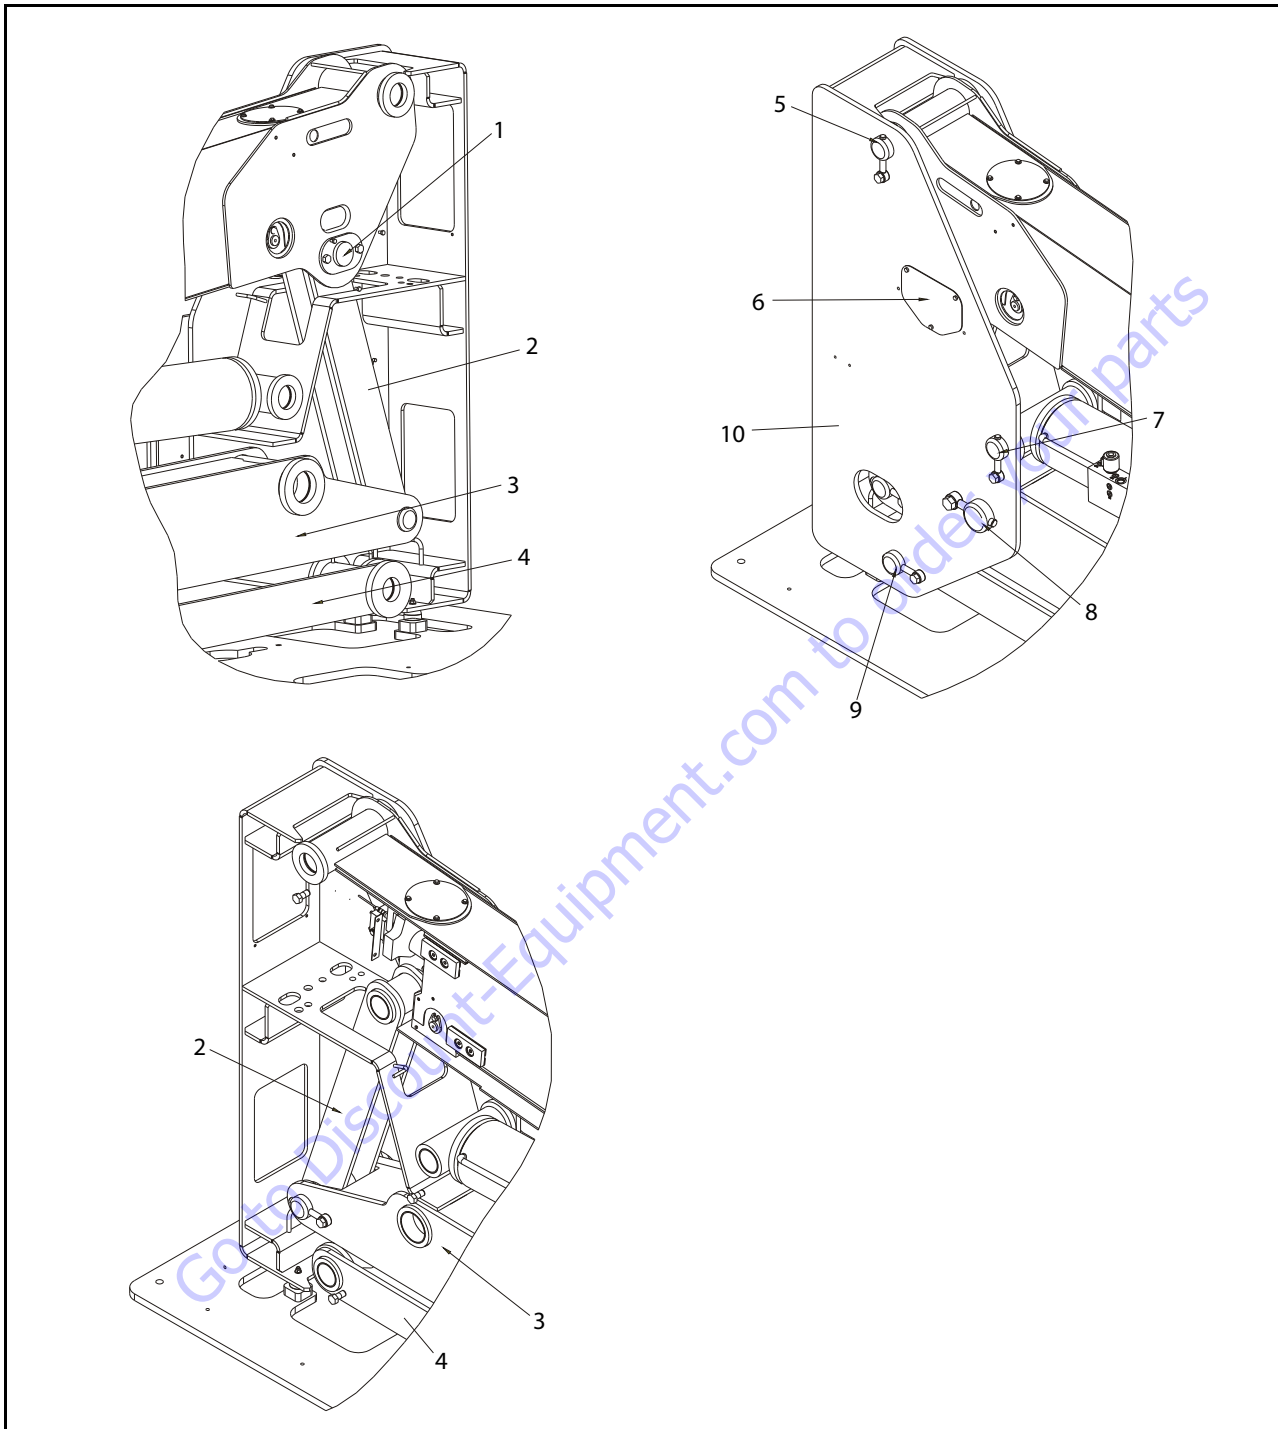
Boom Assembly Cutaway - Sheet 1 of 2
